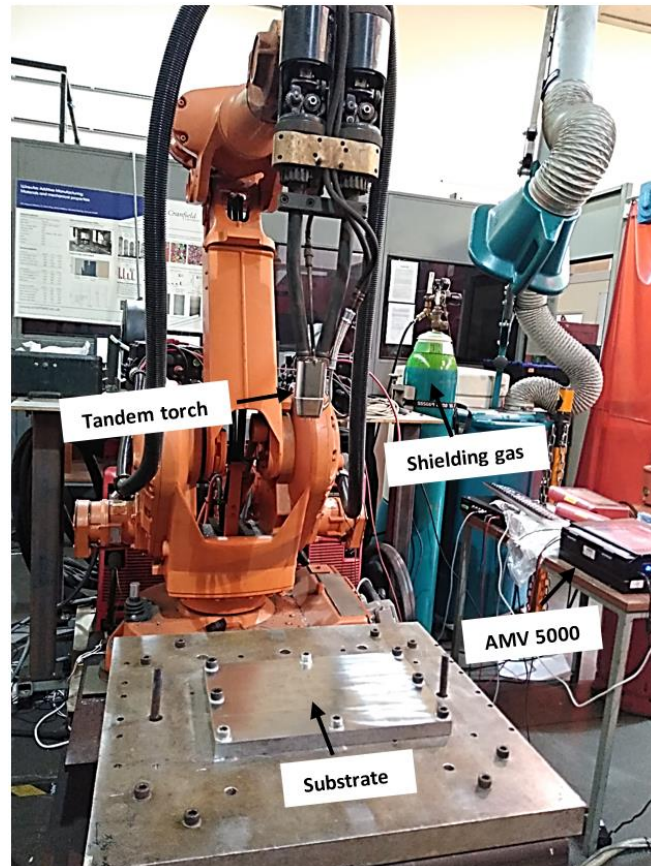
Equipment set-up, used for building the skin and core part (Substrate bolted to support table)
